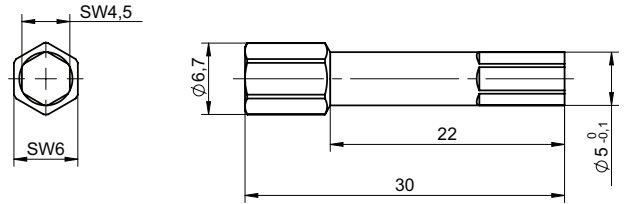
Mounting tool Type 1300A167 Type 1193A
